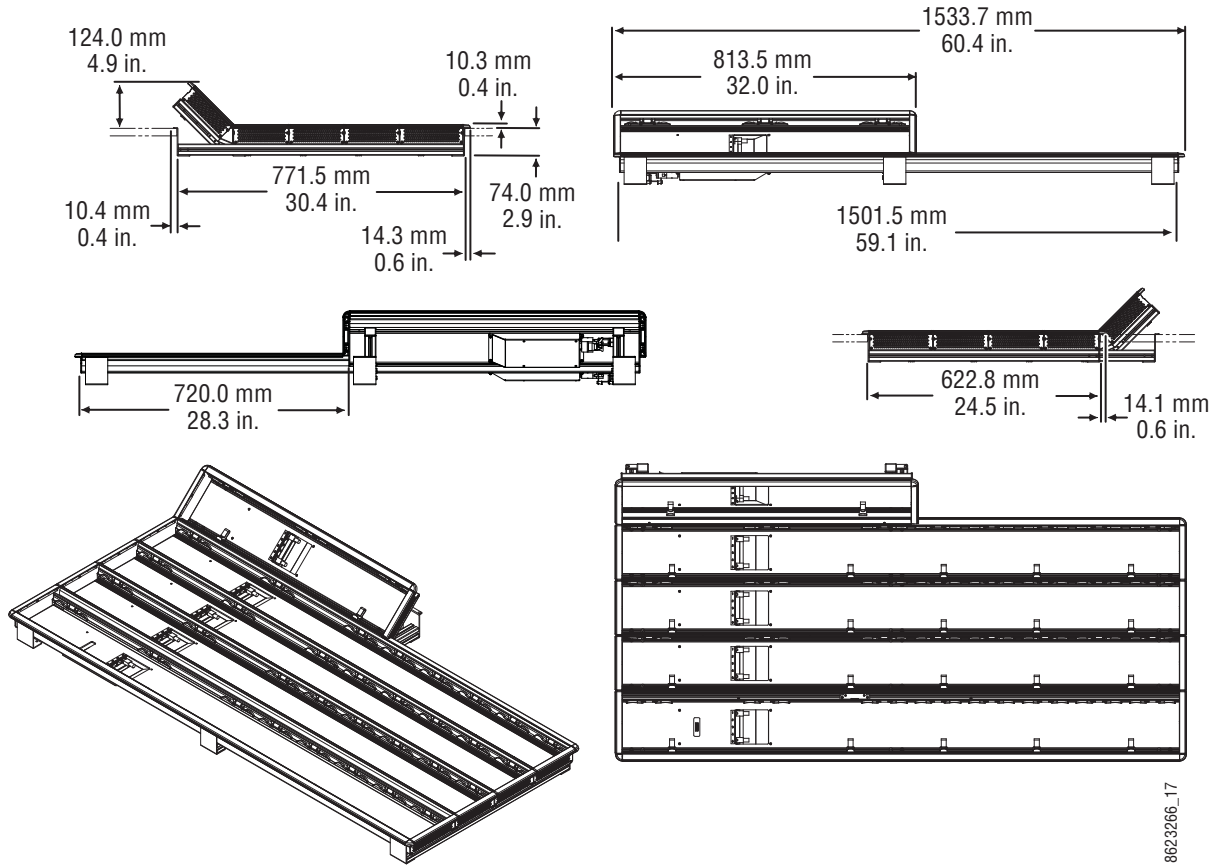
4-ME Control Panel Cutout Dimensions, Flat Installation
